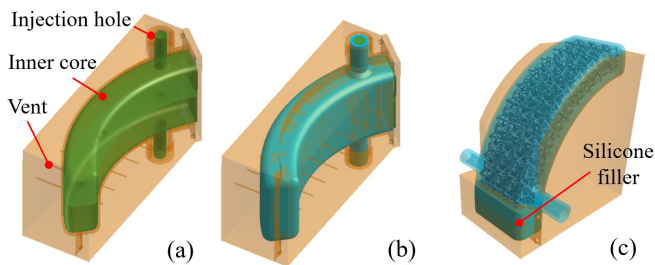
(a) The molds for casting the finger chamber. (b) Casted finger chamber. (c) Casting the silicone filler to embed the chain mails.
